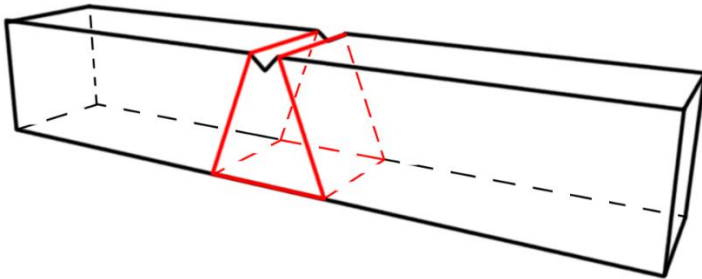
Illustration of orientation of weld in Charpy impact test.
